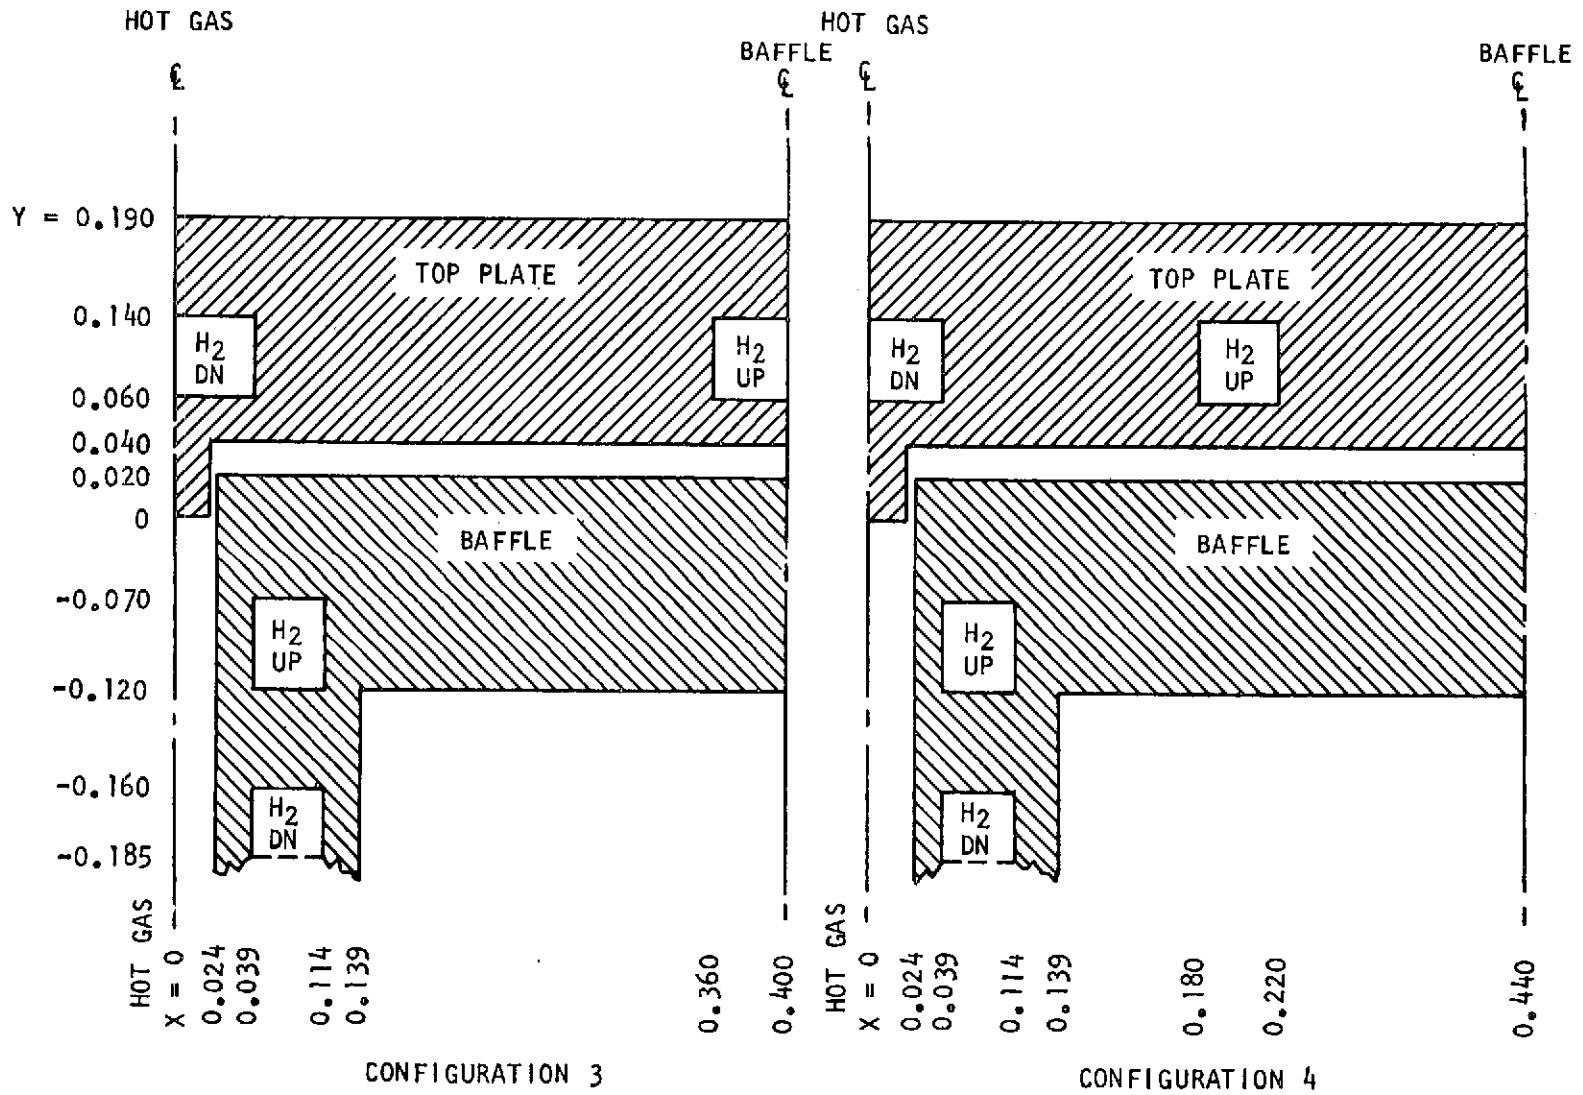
Baffle and Top/Bottom Wall Geometry (cross section through baffle and wall)
